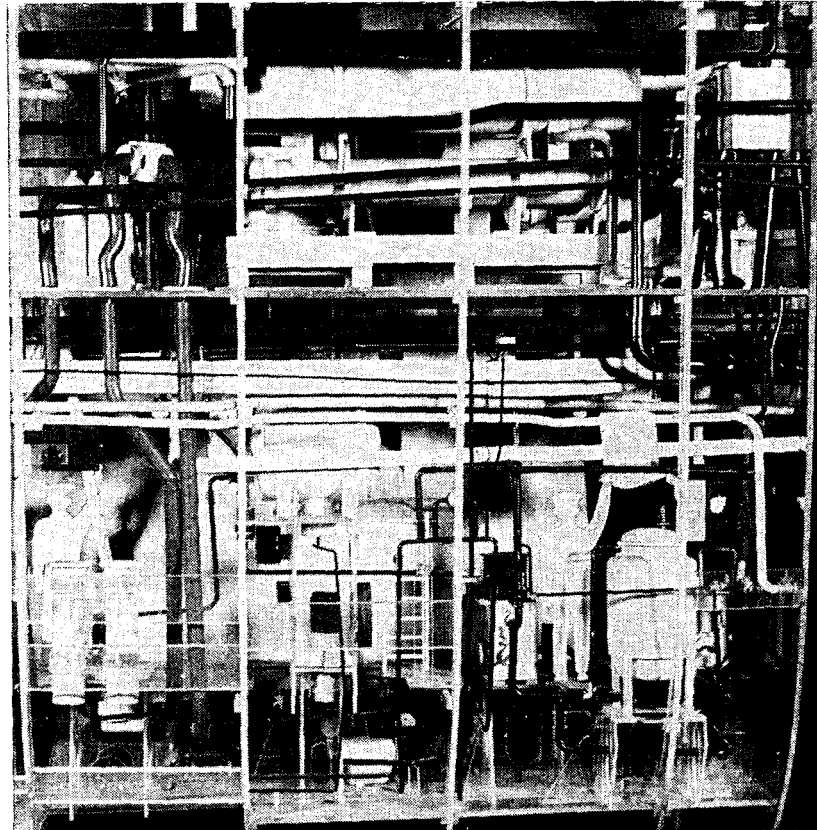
PART OF TYPE 22 GUIDANCE DRAWING STAGE MODEL—TYPICAL AREA OF MODEL SHOWING EXTENT OF PIPING AND FITTINGS
